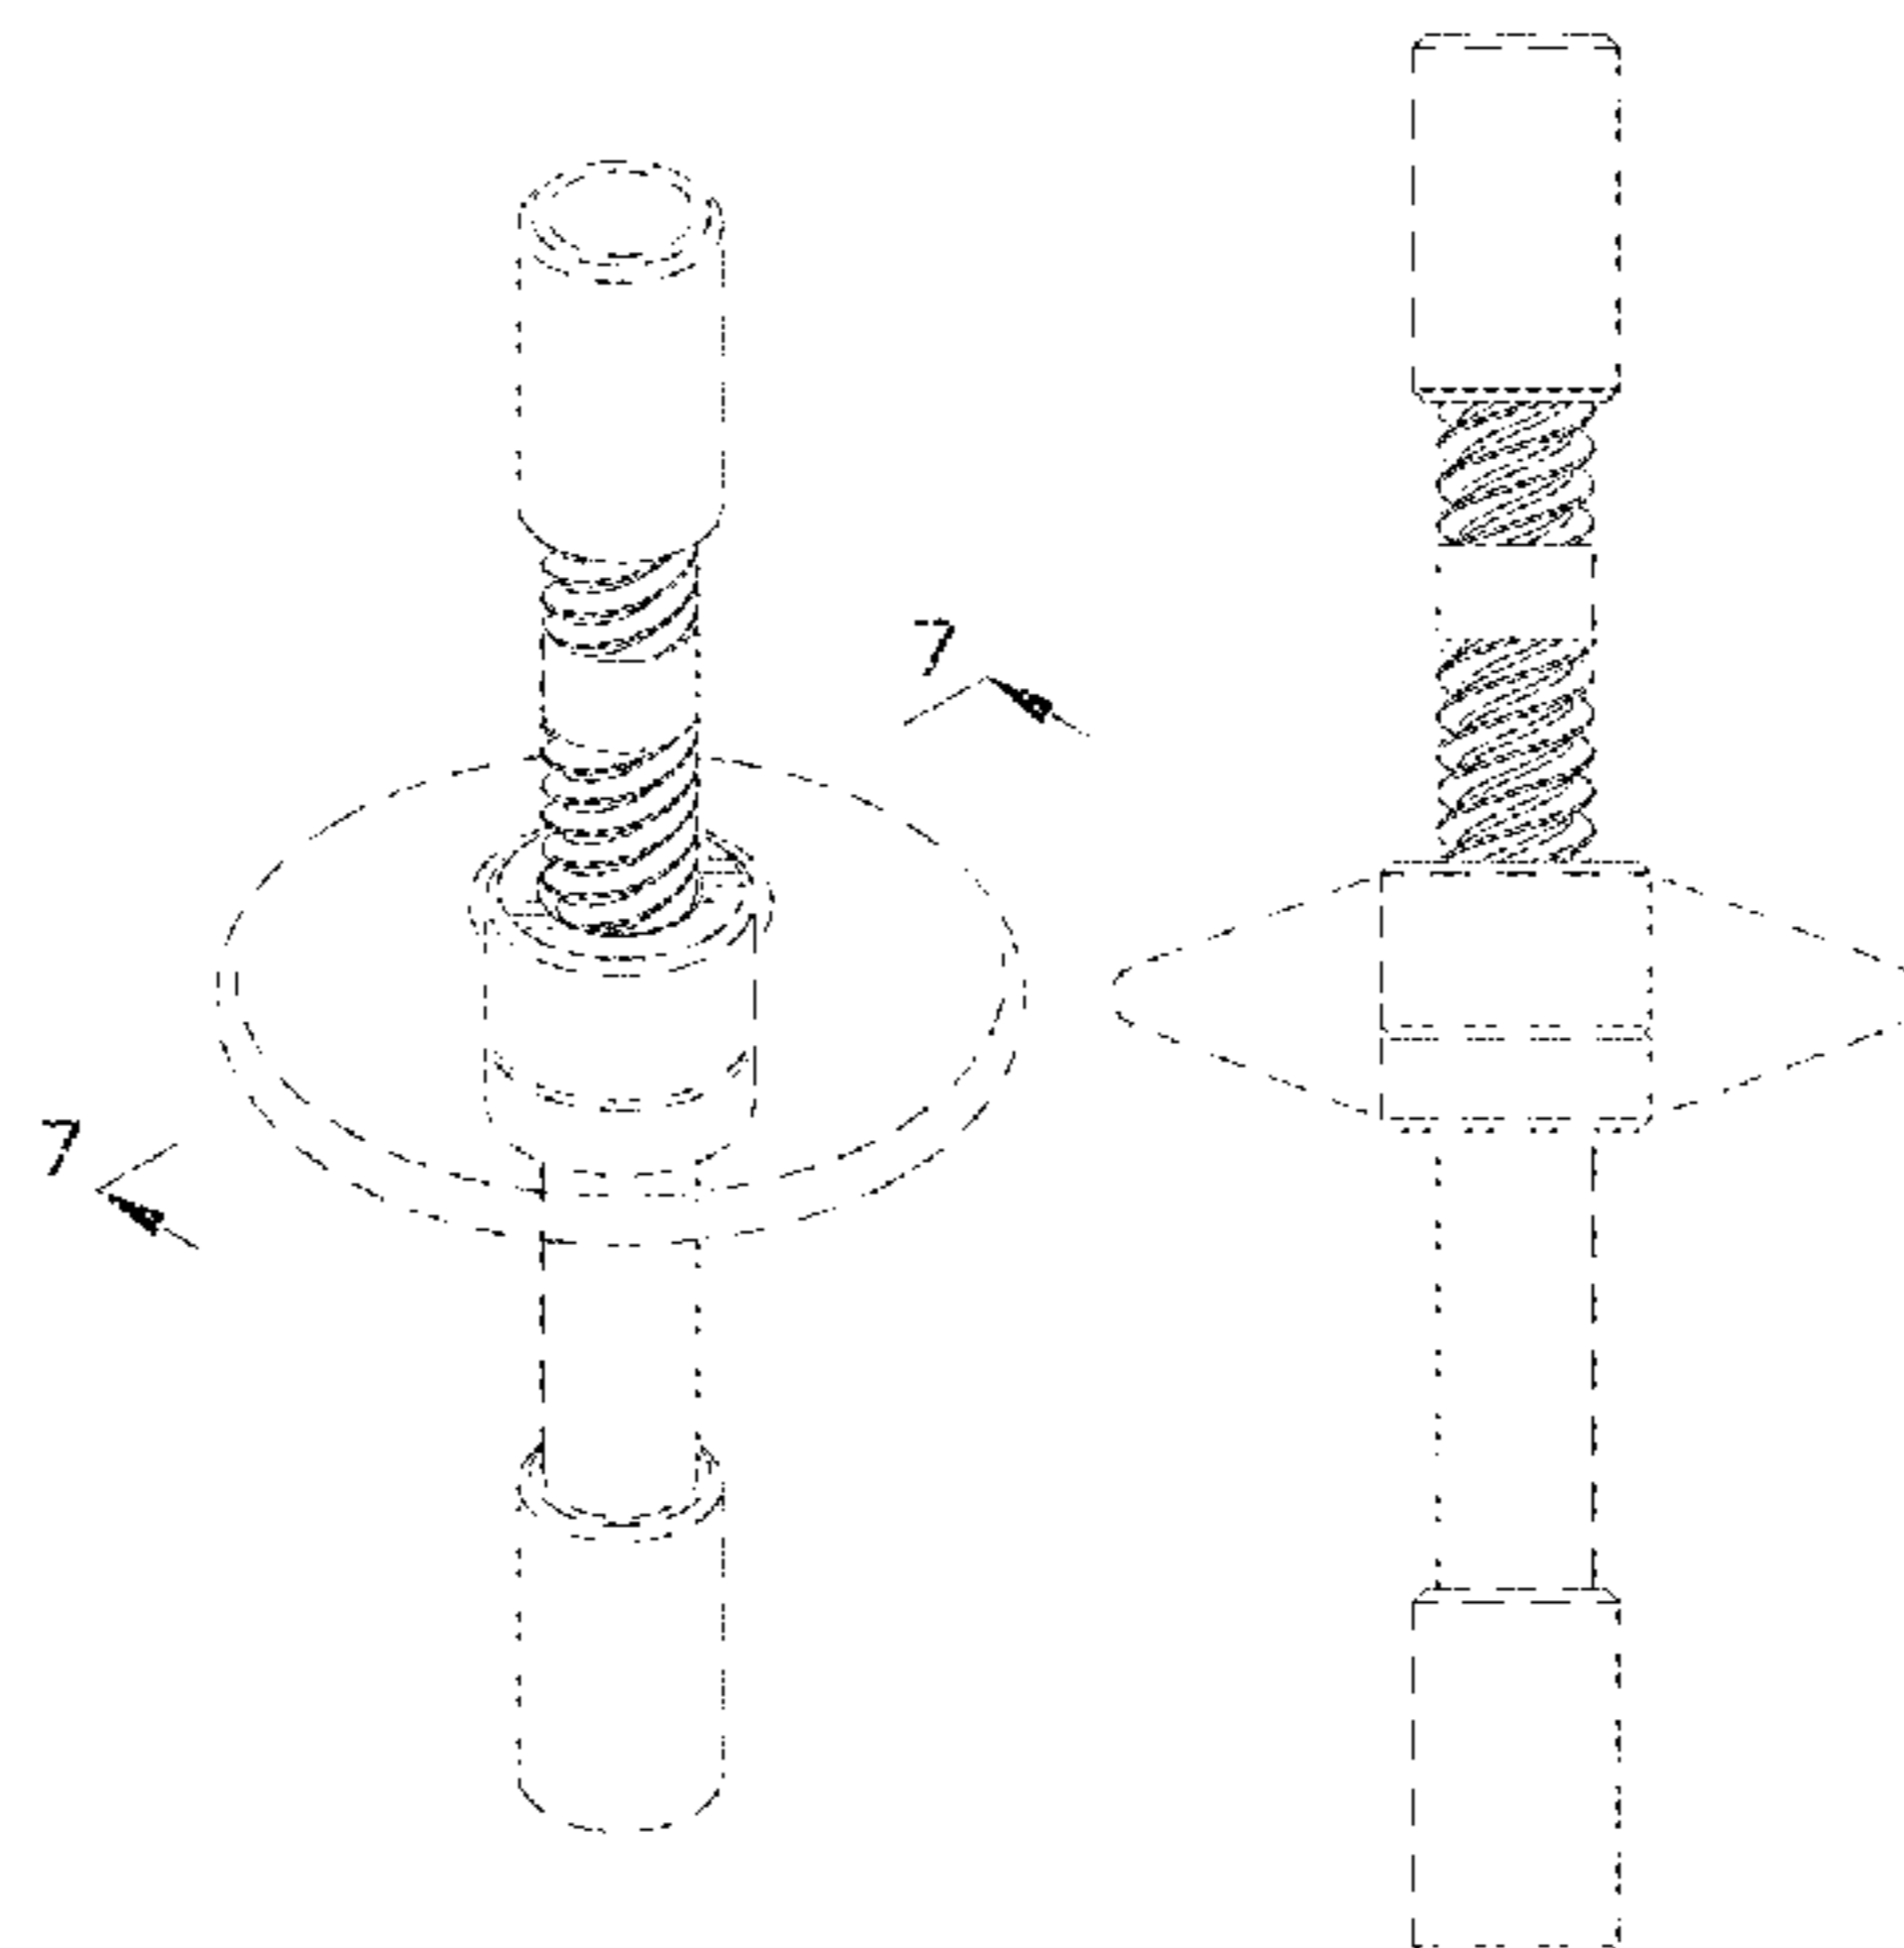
is a top front perspective view of a third embodiment of the spinning disc and spindle toy, showing my design;
